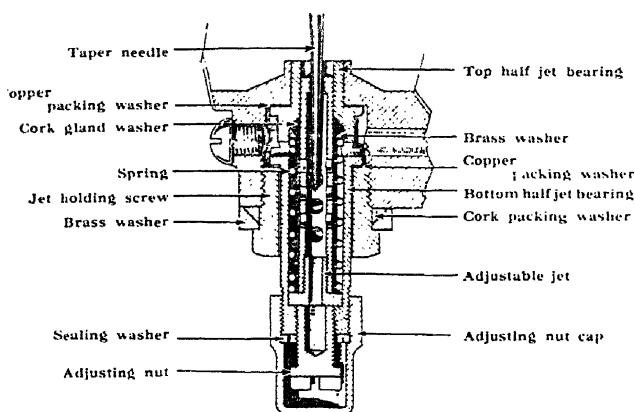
Sectional View of Jet Unit of S.U. Carburettor.
